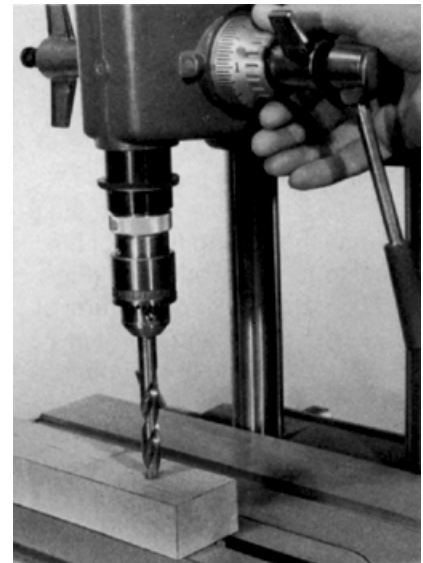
Extend the quill until the cutting flutes of the bit just touch the workpiece.
